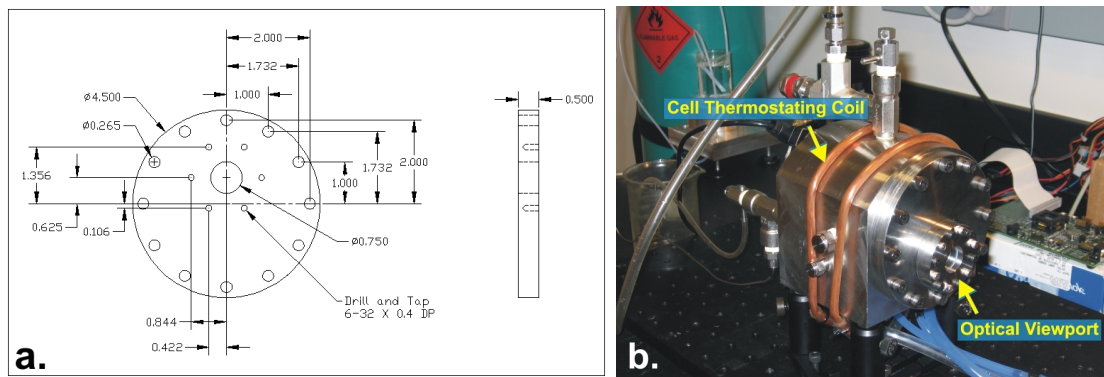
(a.) Construction drawings for the detachable viewport face plate, and (b.) optical image displaying the viewport and detachable face plate assembly attached to the main body of the pressure chamber. A cell thermostating copper coil is additionally indicated for later reference.
